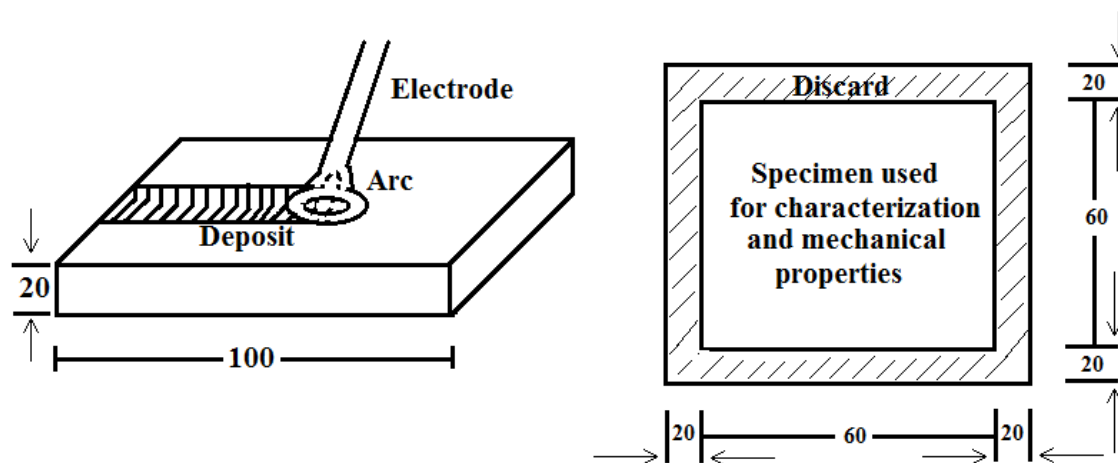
Schematic diagram of weld overlay on steel surface at flat position (all dimensions in mm).
